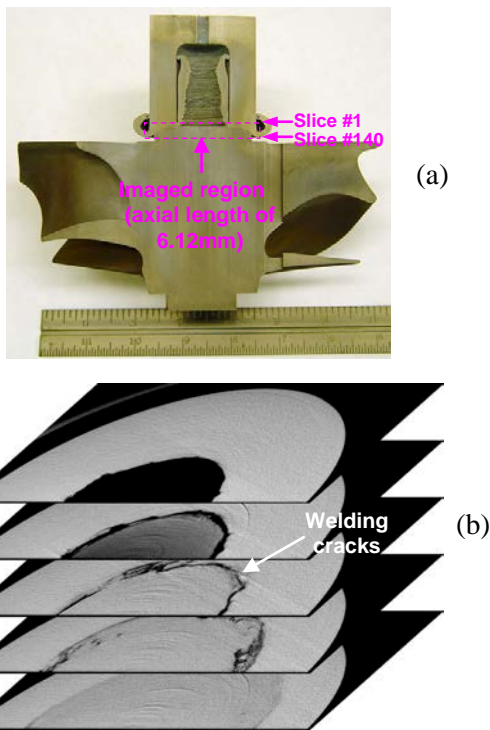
(a) A cut turbocharger rotor sample and (b) typical x-ray CT slices around weld interface.
